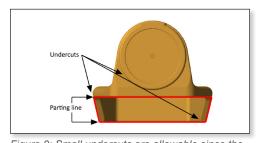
Small undercuts are allowable since the silicone mold will flex when extracting parts.
